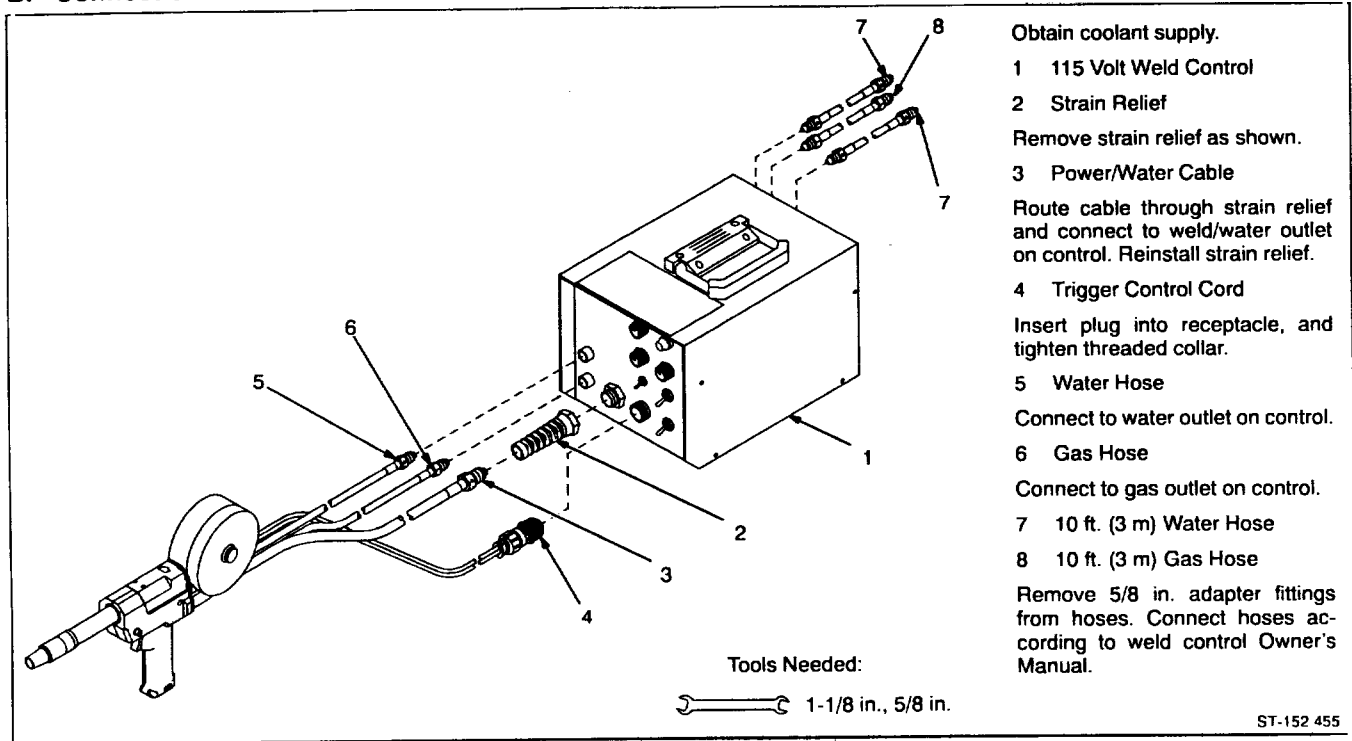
Connections To 115 Volt Weld Control
